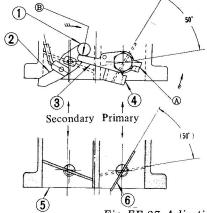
shows that primary throttle valve opens 50°. When primary throttle valve opens 50° adjusting plate integrated with throttle valve is in contact with return plate at
